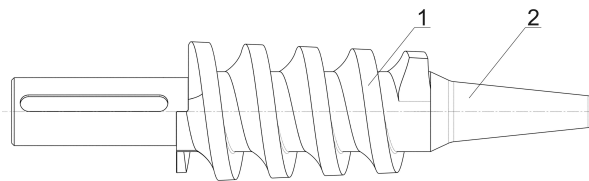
Monolithic pressing screw (1 - working thread part of the screw, 2 - tip)
